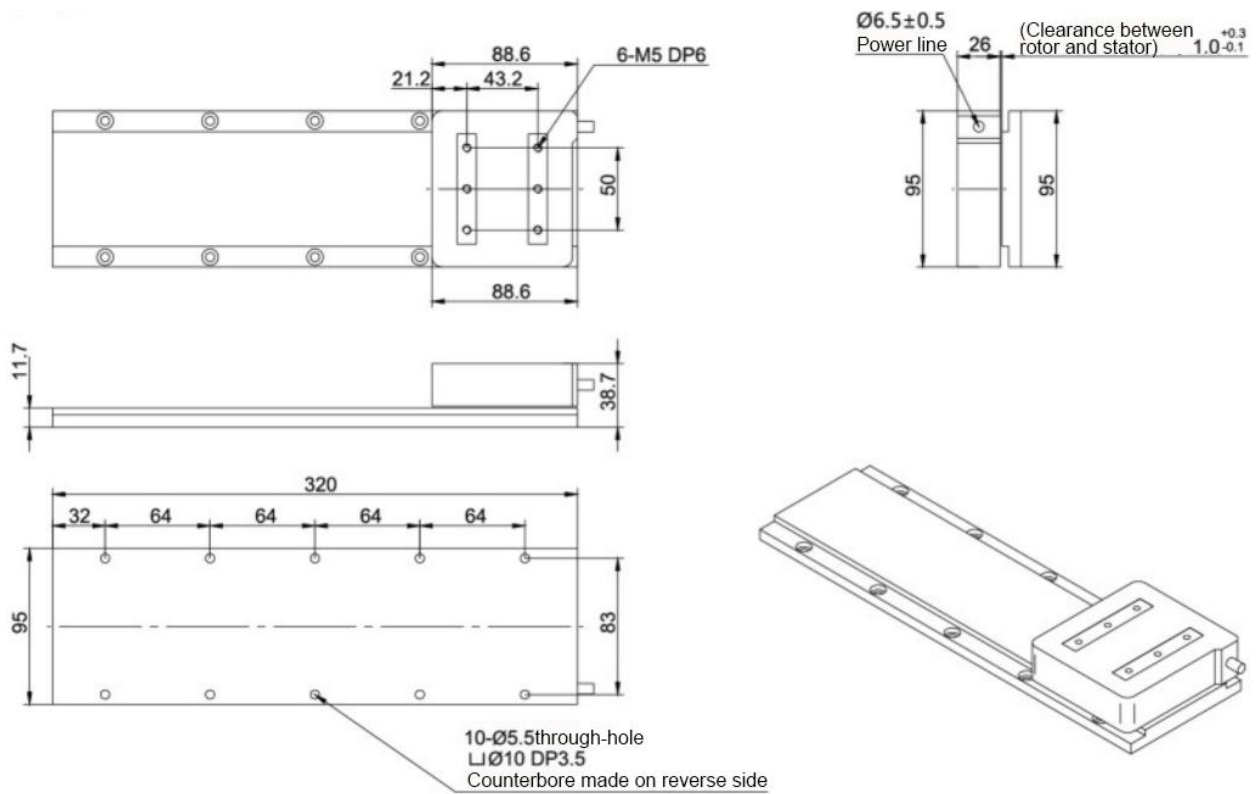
Dimensional drawing of WZCR-AZ95C1-□ motor
